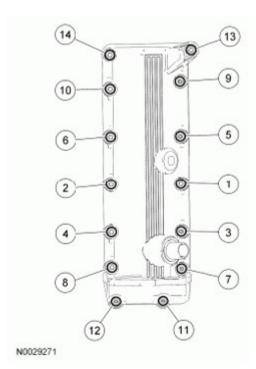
Locating Valve Cover And Cylinder Head Courtesy of FORD MOTOR CO.
